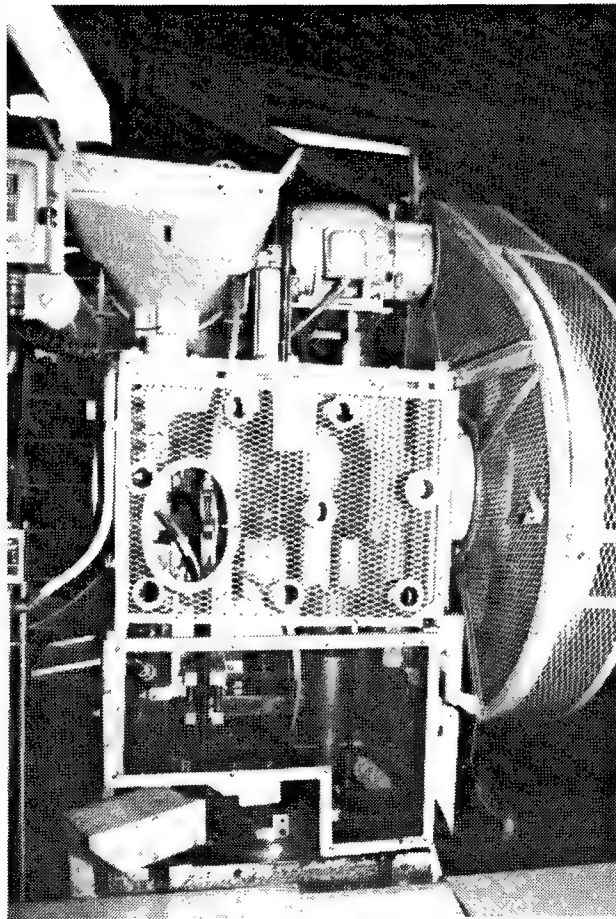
Building 4: Case Taper Machine manufactured by E. W. Bliss Co.
